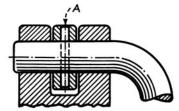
Swinging rod retained by pinned collar A. Both lugs are integral with the casting.
